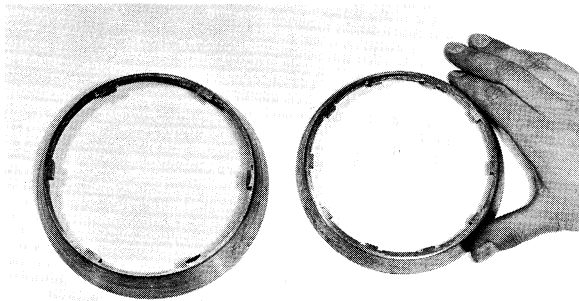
Red Ring built-up broach design has inserts staggered to divide the cut in producing internal spline teeth from the solid in 1/4-in. thick aluminum synchronizer rings.
